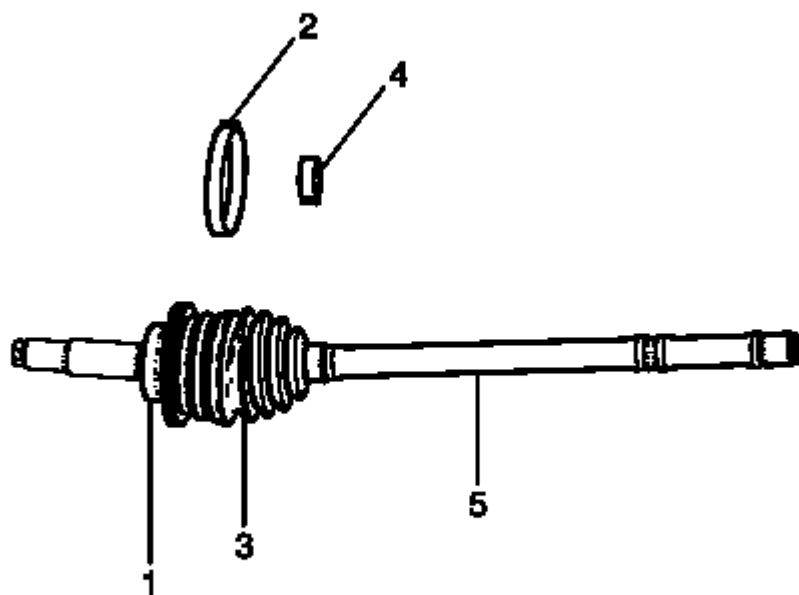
Boot Retaining Clamp, Outer Joint And Boot
